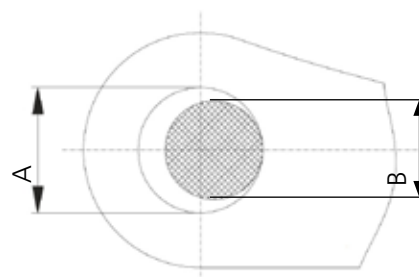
Dimensions: Hinge bore in body and body hinge pin
